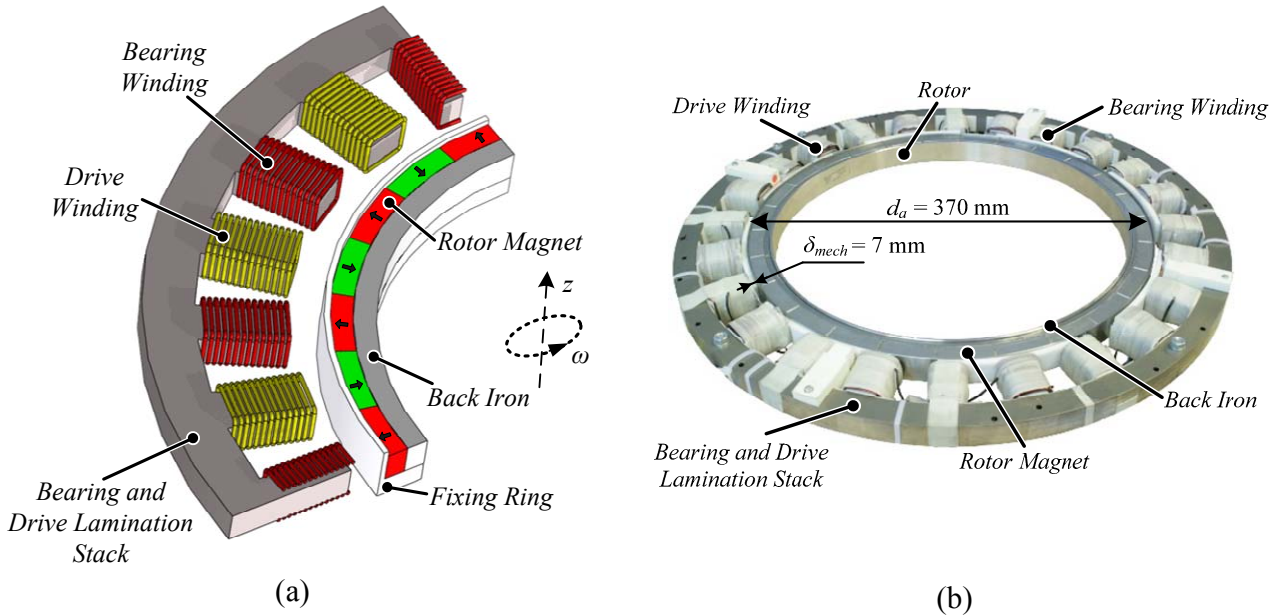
(a) Schematic cut view through the Bearingless Fractional Pole/Slot Motor (BFM) and (b) picture of the laboratory prototype.
